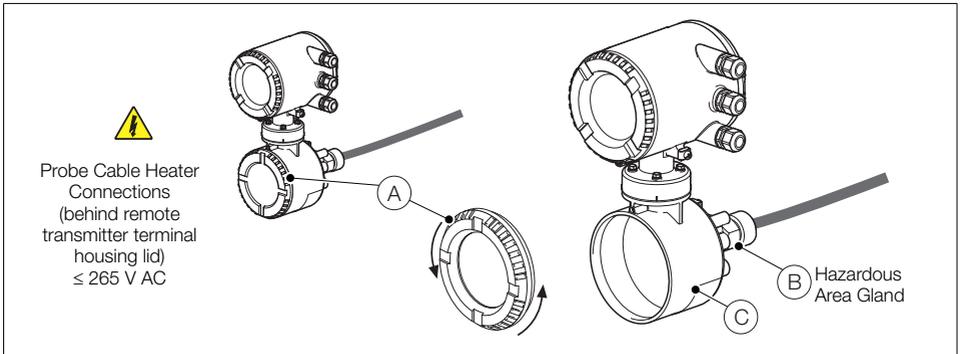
Access to Terminals – Remote Transmitter Terminal Housing
